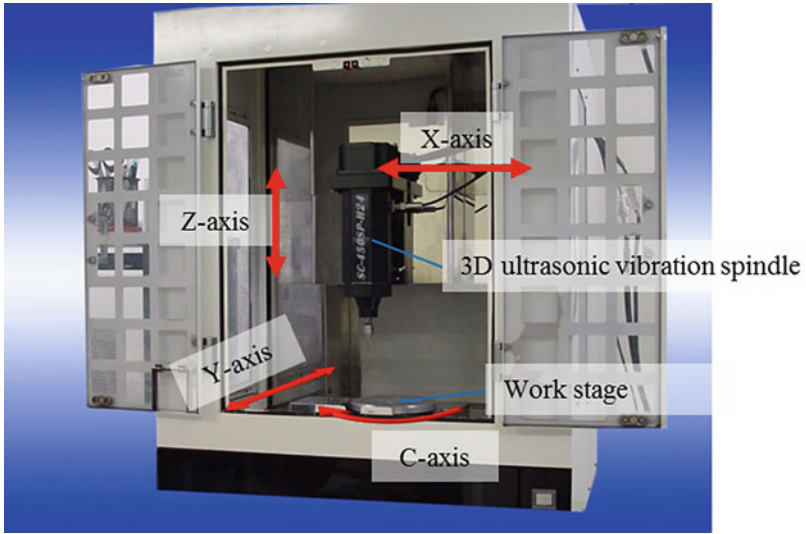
Equipment used for the RUT process: an ultrasonic vibration spindle mounted on a CNC machine
